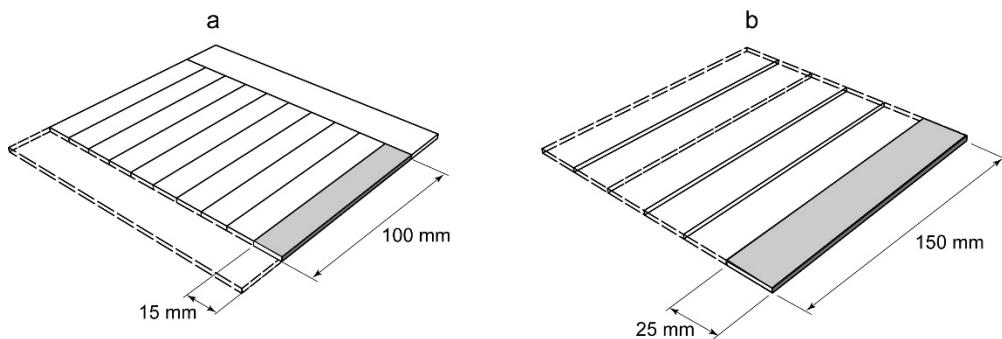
Specimen sectioning for: a) flexural testing; b) tensile testing.
